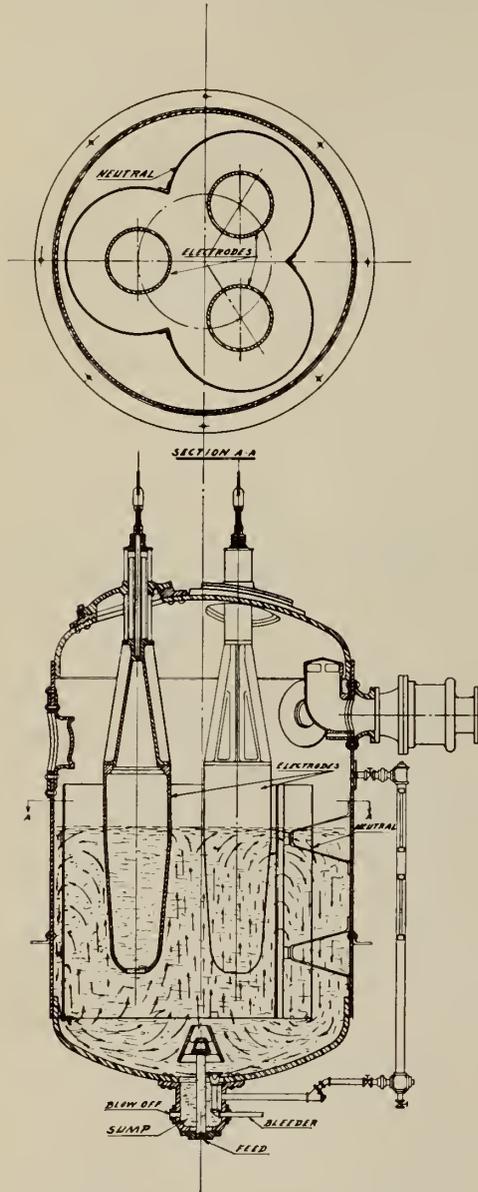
Sectional View of a 25,000-kw., 6,600-volt Kaelin Electric Boiler.
